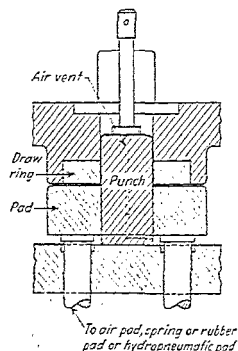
Cross section of inverted drawing die for single-action press; die is attached to ram; punch and pressure pad are on bed of press.
